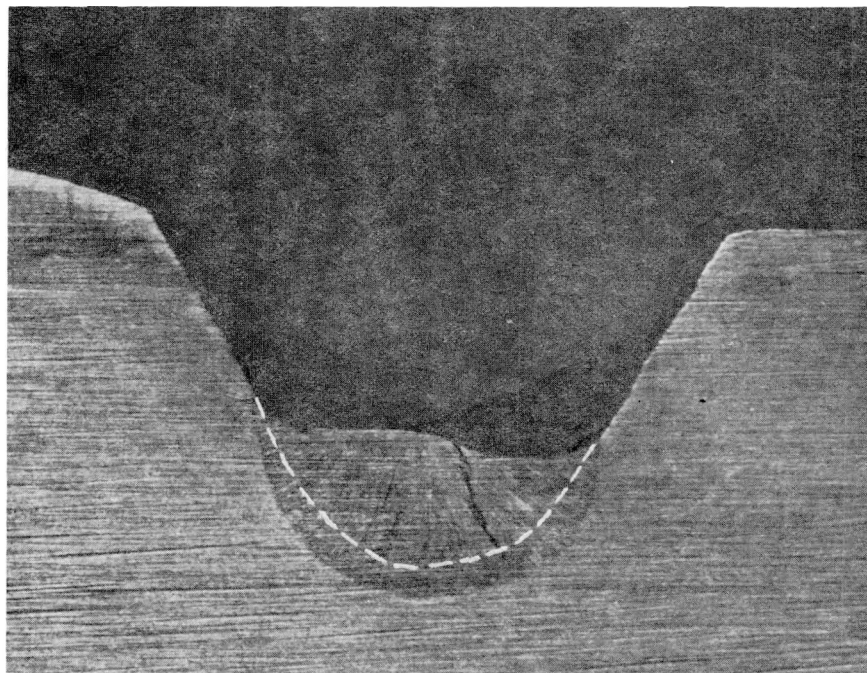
Photomicrograph of a cross section from a segmented circular-groove test specimen.
